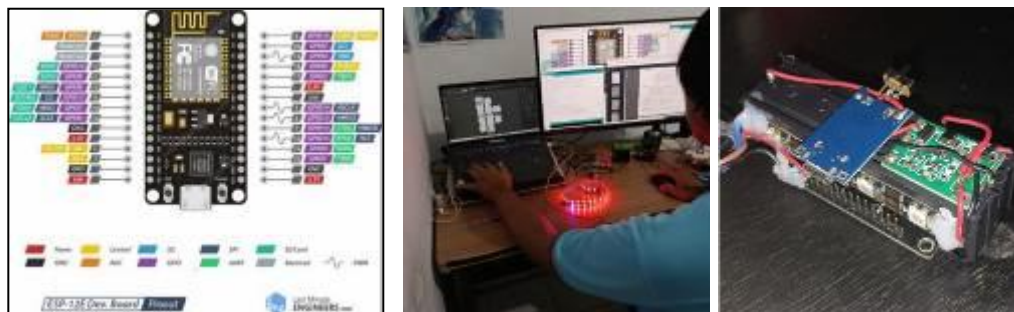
SICEPAT PCB and Schematic Manufacturing Process
